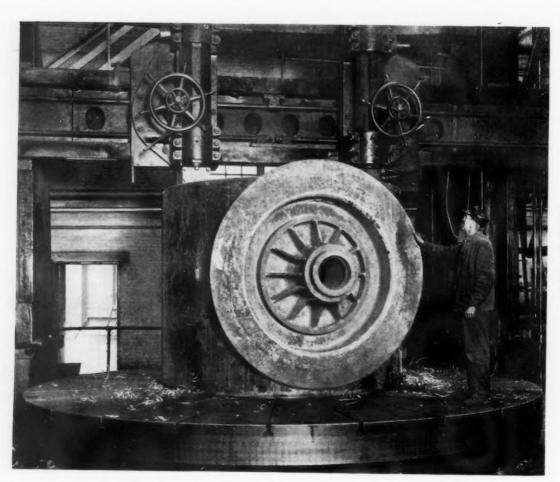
Completed centerpiece being machined on an 18-ft. boring mill. This unit is 104 in. in diameter and 82% in. high.
